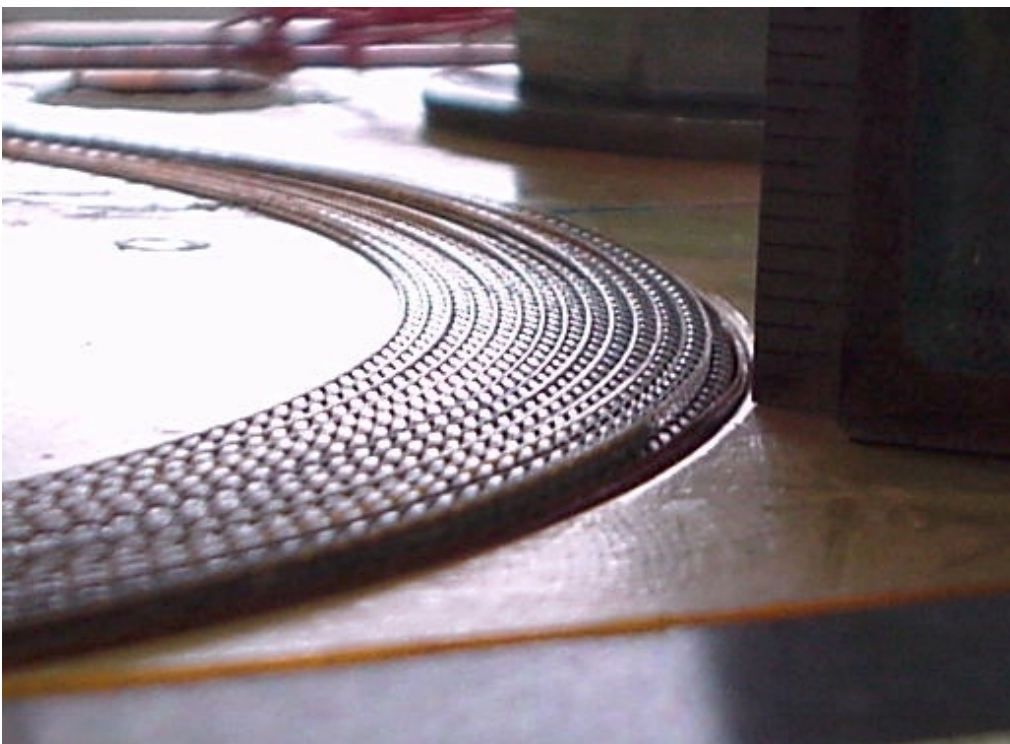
WE HAVE A PROBLEM: the cables in the outer block of the lead end moved upward
